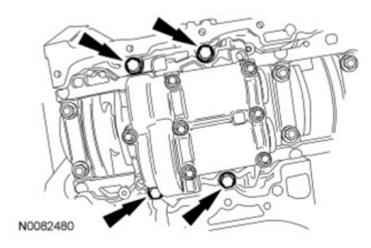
Locating Balancer Unit Bolts Courtesy of FORD MOTOR CO.
